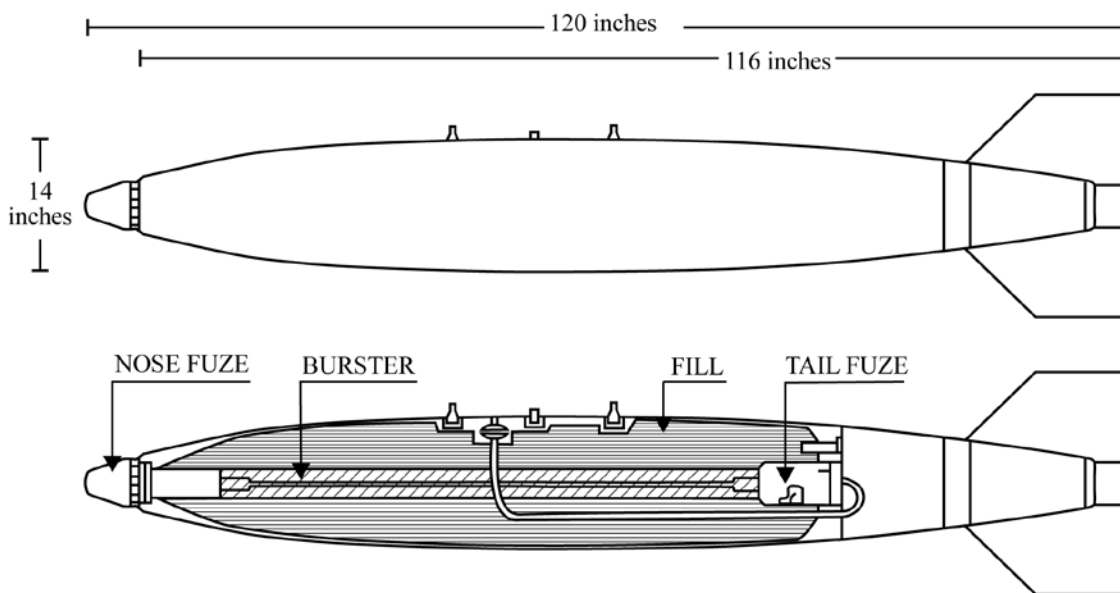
Bomb, 500-pound, EX38 - Line Drawing
